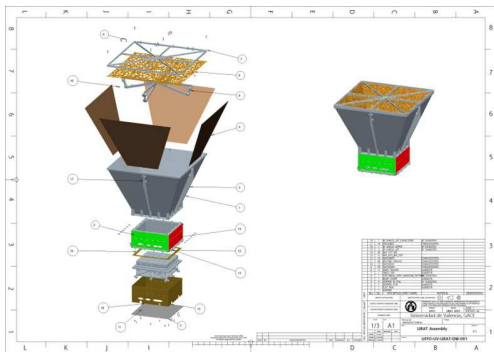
UFFO Pathfinder Burst Alert Telescope Assembly Drawing
